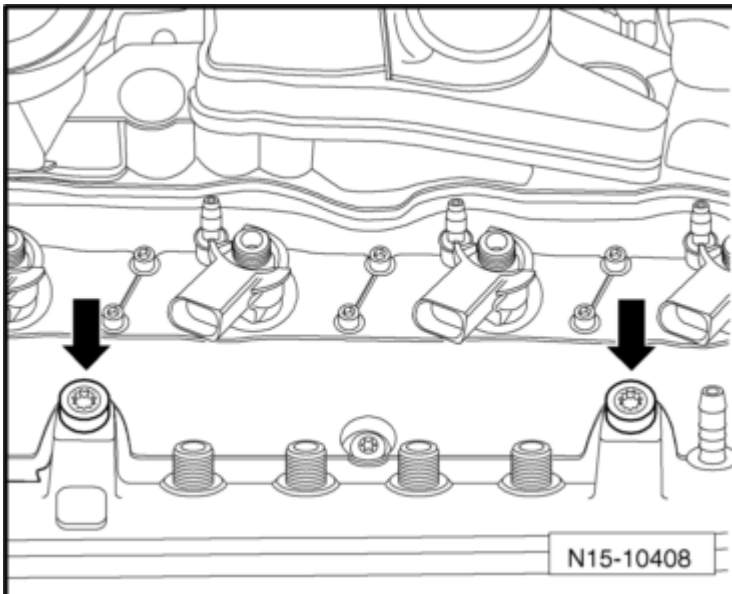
Identifying Bolts -Arrows- And Fuel Rail
